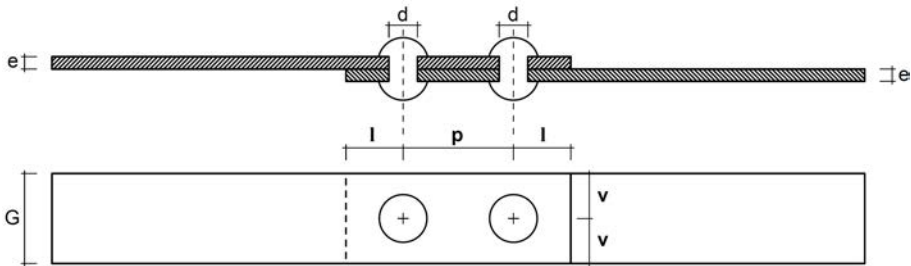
The pattern of rivets is defined by three geometrical parameters, the rivet pitch p , the rivet lap l and the edge distance v (double riveted single lap joint)
